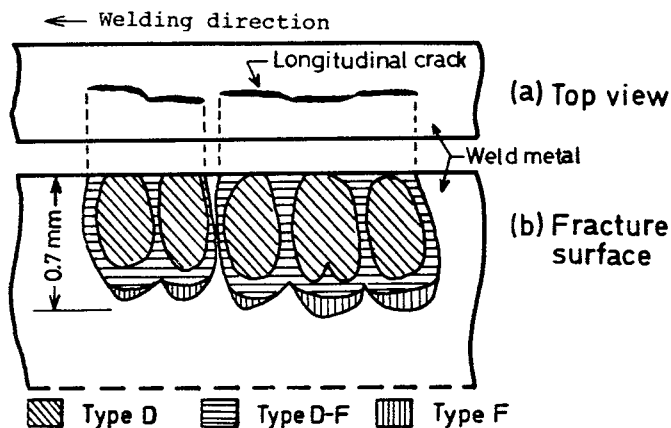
Schematic illustration of surface morphology of longitudinal cracks in GTA bead weld metal(350A, 20V, 1000mm/min), indicating features of solidification crack.
